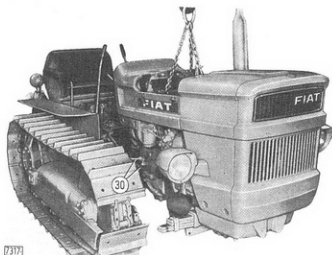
Removing (or Refitting) Engine/Gearbox Unit using Lifting Chain Part No. 290740
